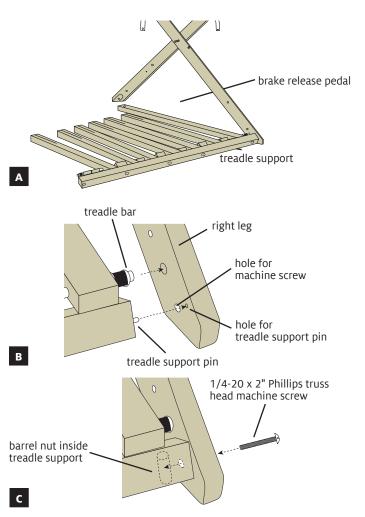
ATTACH TREADLE ASSEMBLY TO INSIDE LEGS
